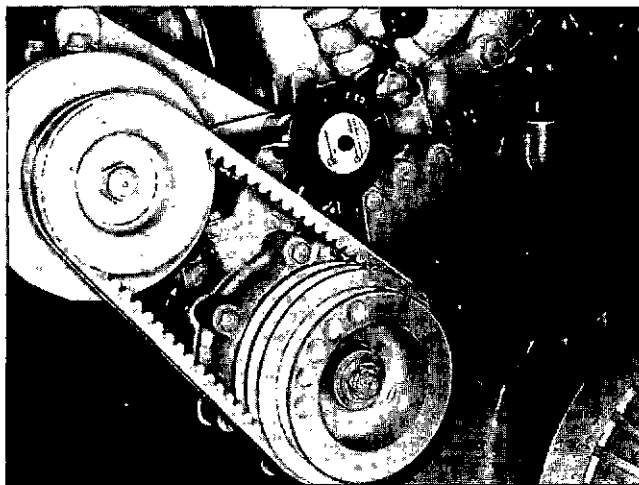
, V414226. Checking belt tension with ST-1138
